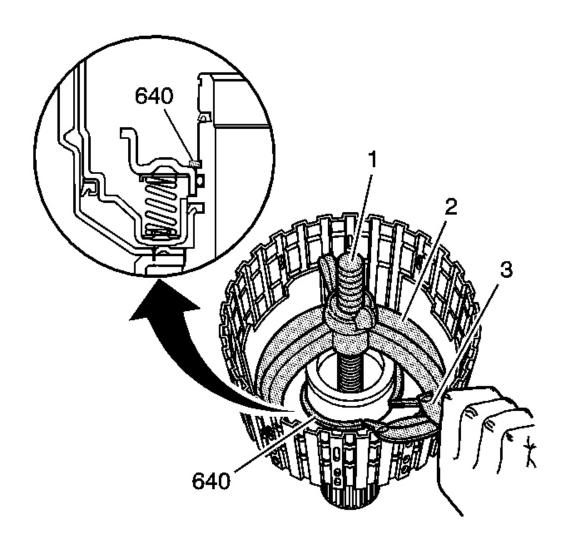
Compressing The Input Clutch Spring And Retainer Assembly Using J 23327 & J 8059
